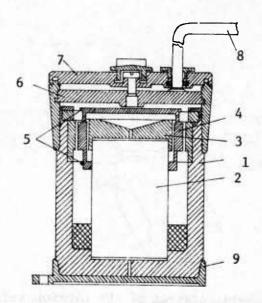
Schematic drawing of the OSP-1 seismometer [6]
